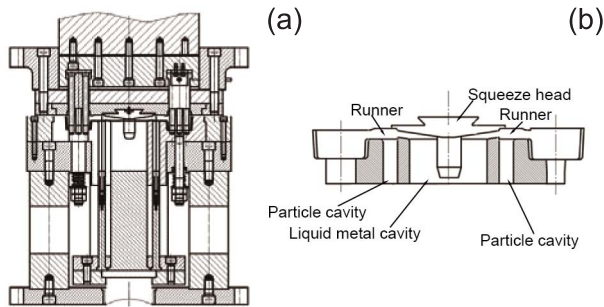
(a) Mould assembly drawing of squeezing casting composite parts (b) Runner of squeeze casting mold
